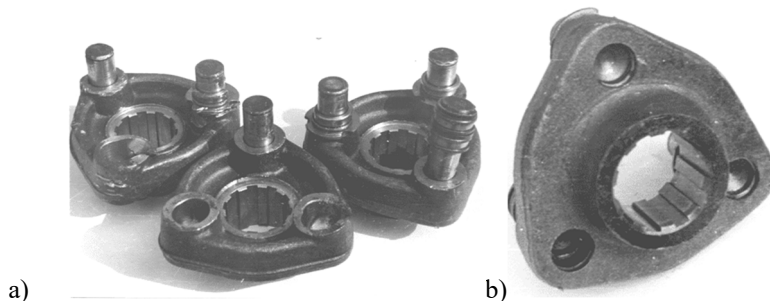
Failure of the elements of the on-board gearbox: a) Destruction of the on-board gearbox driver; b) self-compression of the fingers of the driver.
